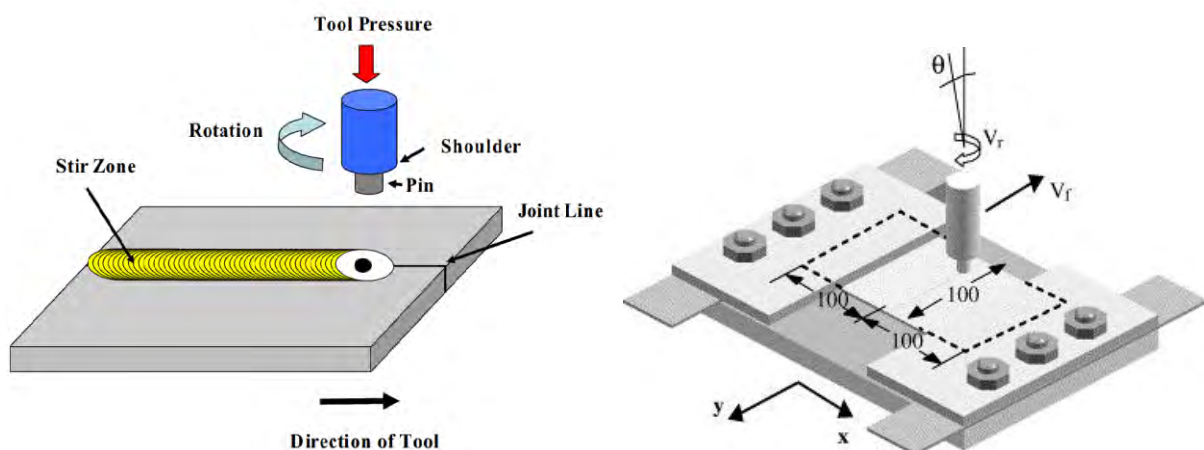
(a) Friction Stir Welding system (b) Friction stir welding process of 2024 T3 AA sheet.
